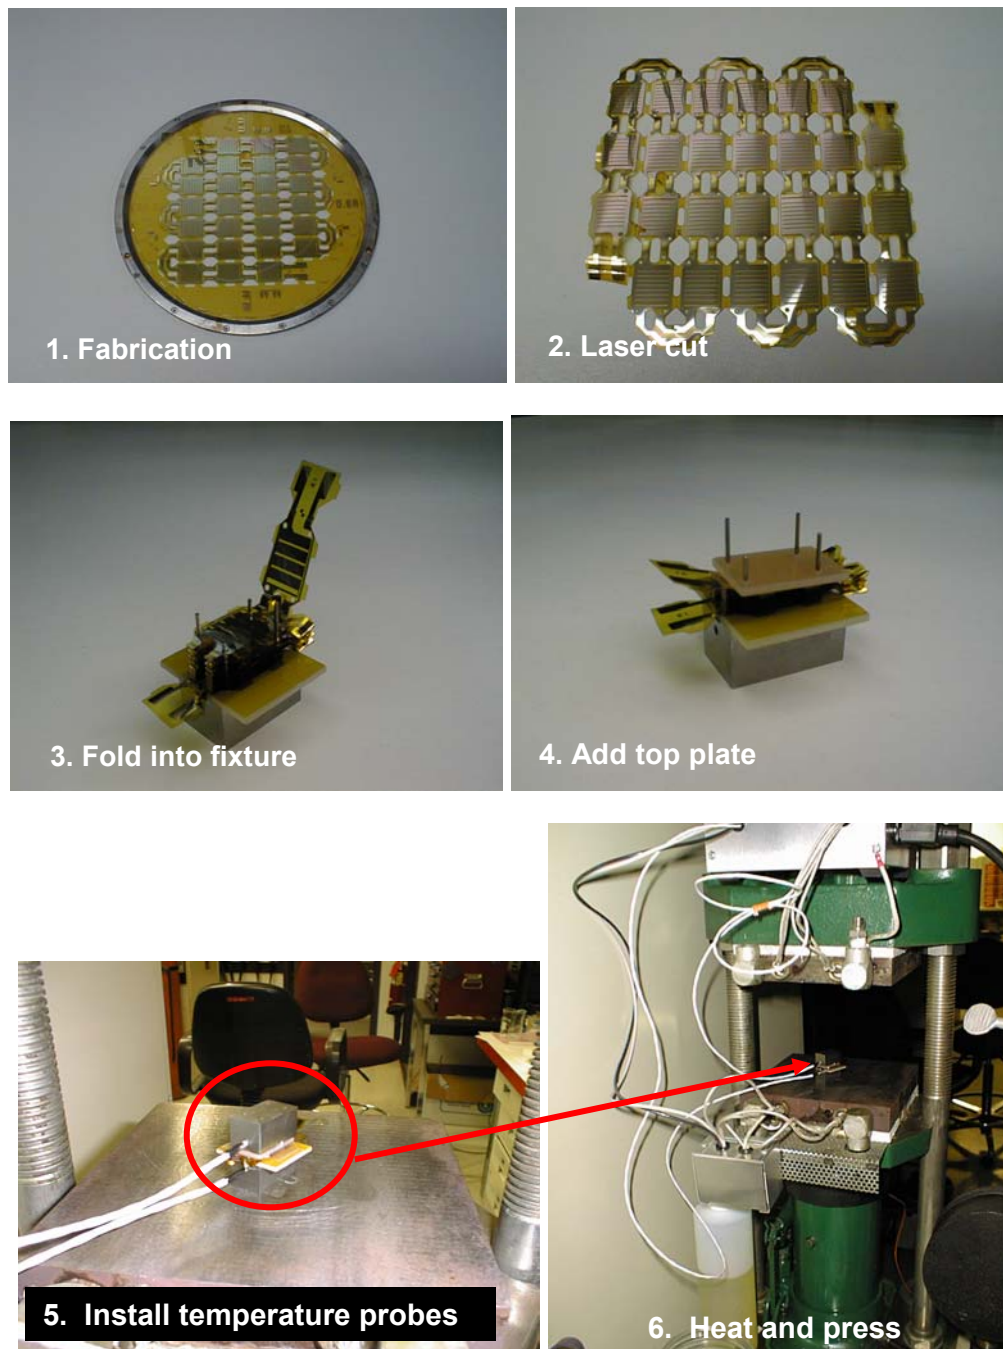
A sequence of photos showing the assembly process of the folded actuator. 1. Actuator features, including the adhesive, are patterned onto a Kapton “wafer.” The features are cut out of the wafer using a UV laser cutting system, but small bridges hold the structure in the wafer. 2. The bridges are cut, releasing the actuator from the wafer. 3. Alignment holes in the structure are
